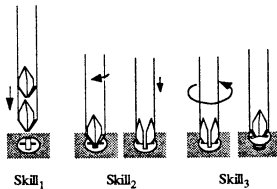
Skill sequence of loosening with a cross-headed screwdriver
